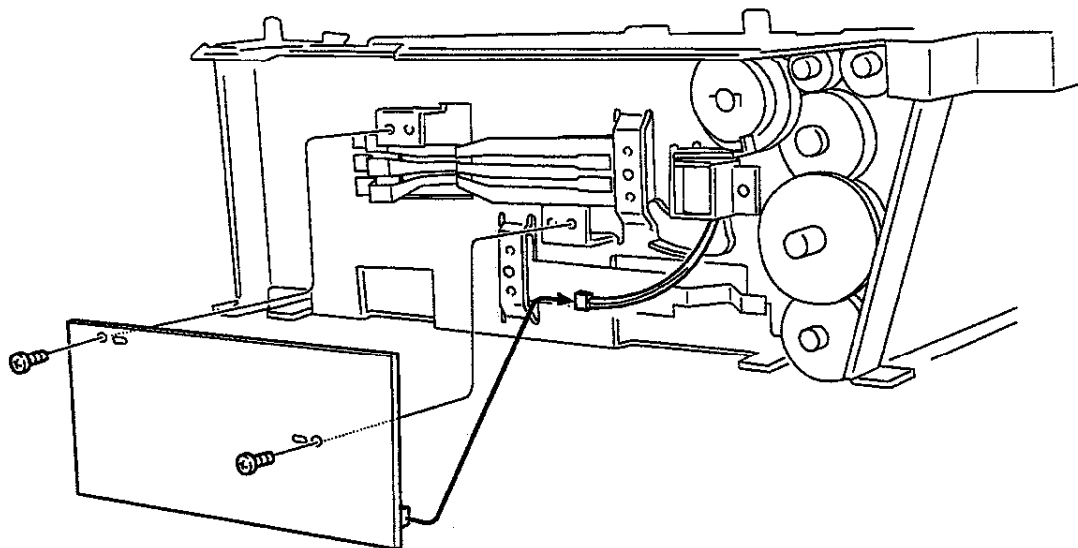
Removing the 500 Paper Size PWB Assembly
